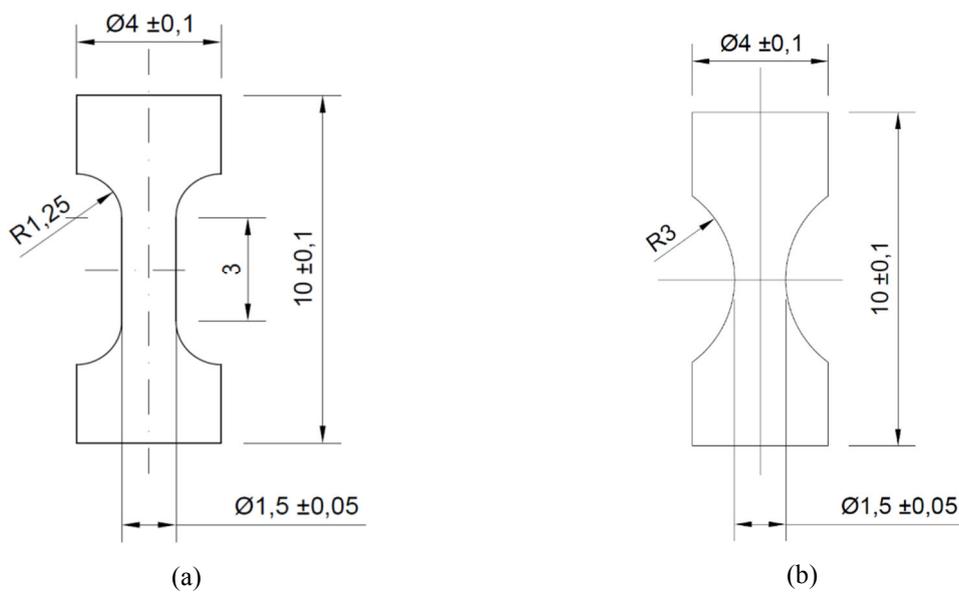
The geometry and dimensions of mini tensile (a) and fatigue specimens (b)
